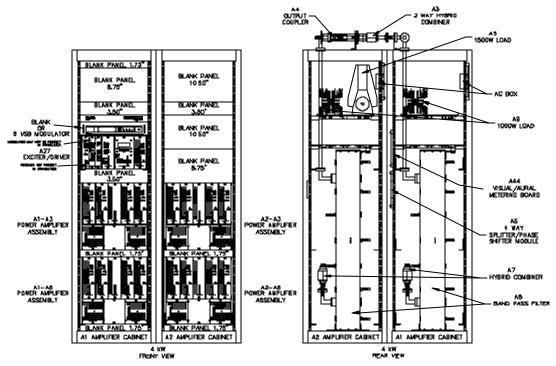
Front and Rear View 76" Cabinet Typical 4kW Configuration
